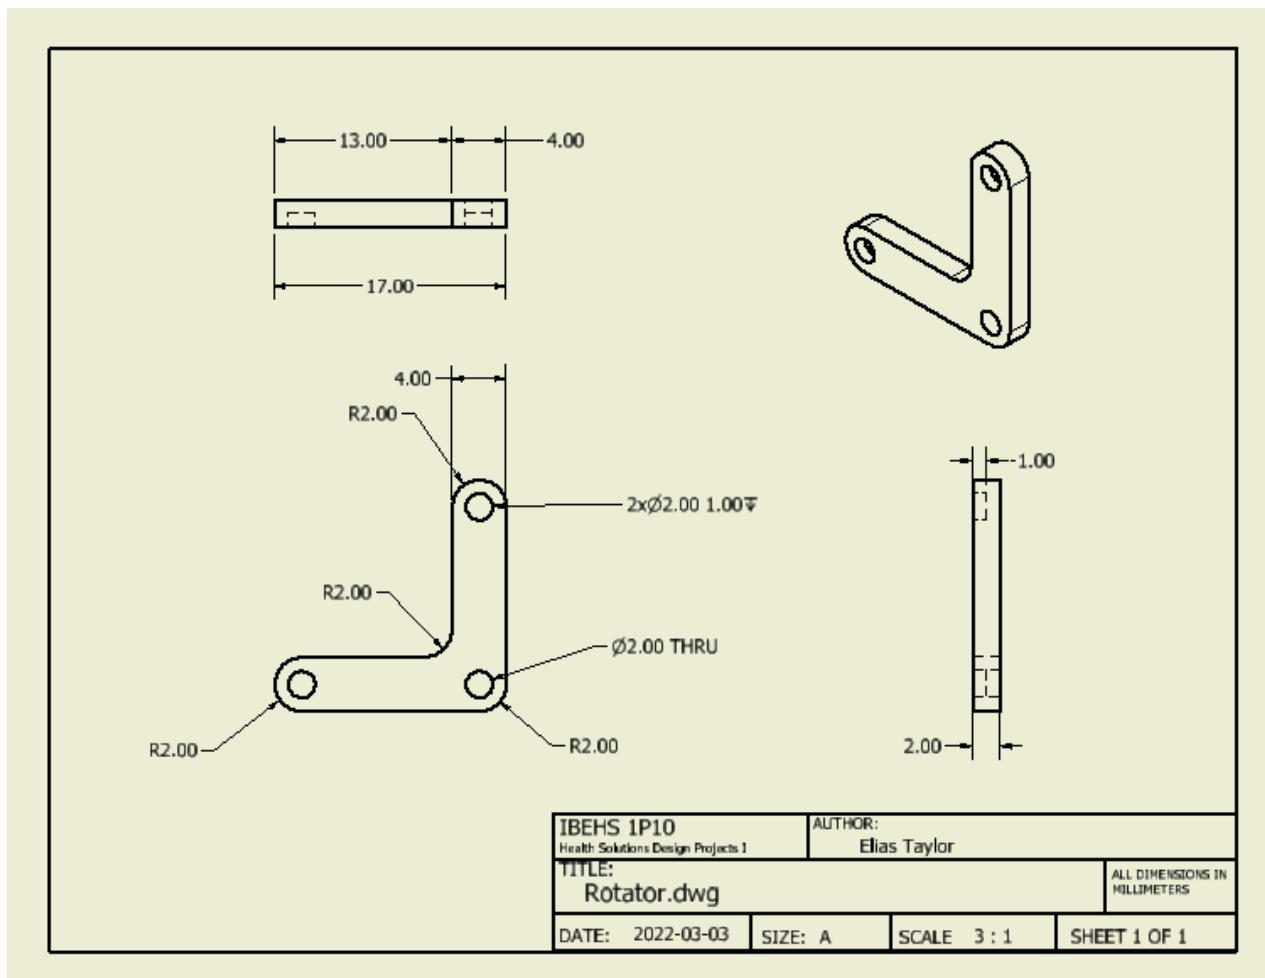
Rotating L-shape piece for bell crank; interfaces with all associated rod components
